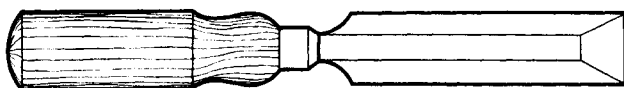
The bevel chisel is used for fine paring and cutting of dovetails.
